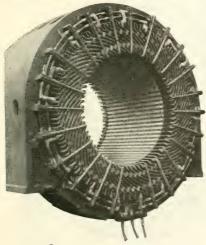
TURBO-GENERATOR WOUND WITH INVOLUTE OR 90 DEGREE COILS
